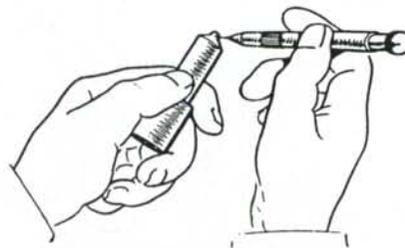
Use a pin vise and proper size cleaning wire to probe all carbon from the four injection spray holes in each nozzle tip.
